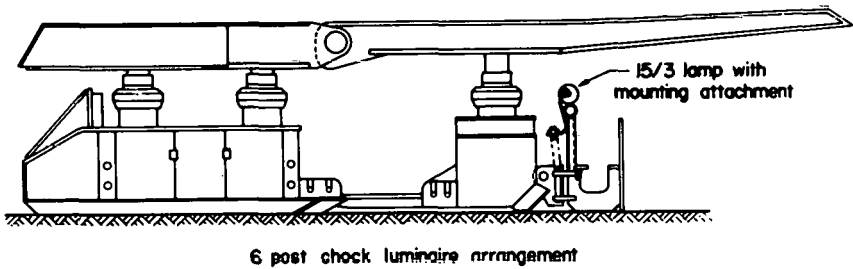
A cross section of the longwall system in use at the Greenwich Collieries, showing a 6-legged support and the general location of the luminaire.
